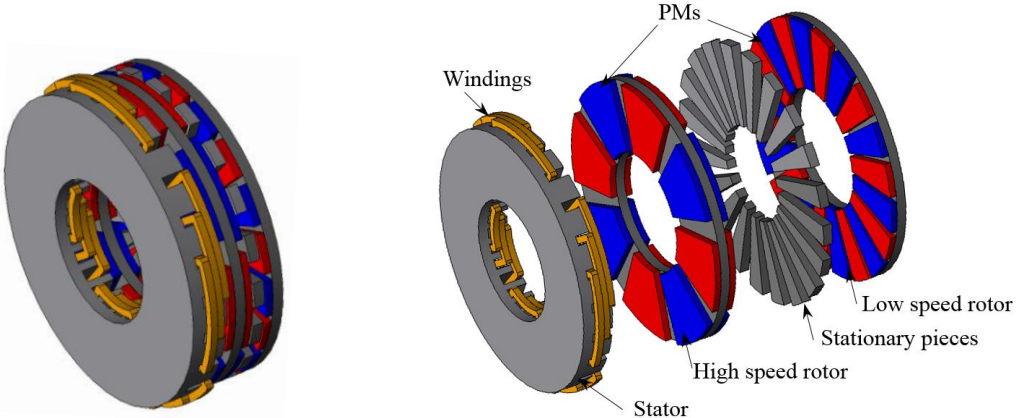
Magnetic geared machine presented in [WAN13].
